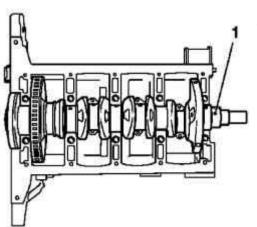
Removing the crankshaft: 1 - kolechaty shaft
